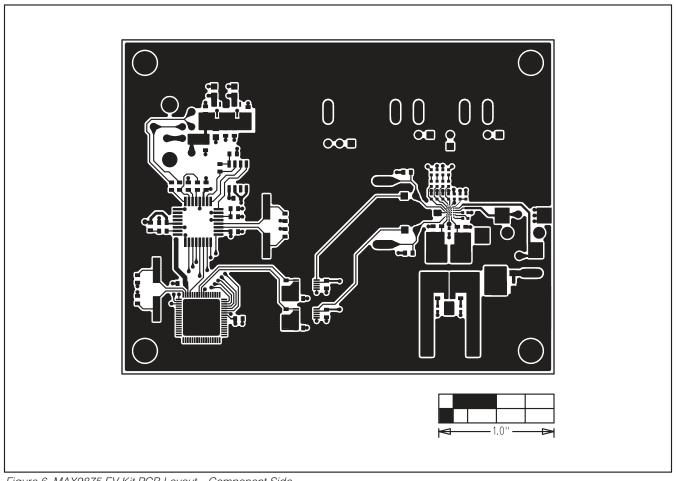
MAX9875 EV Kit PCB Layout—Component Side
